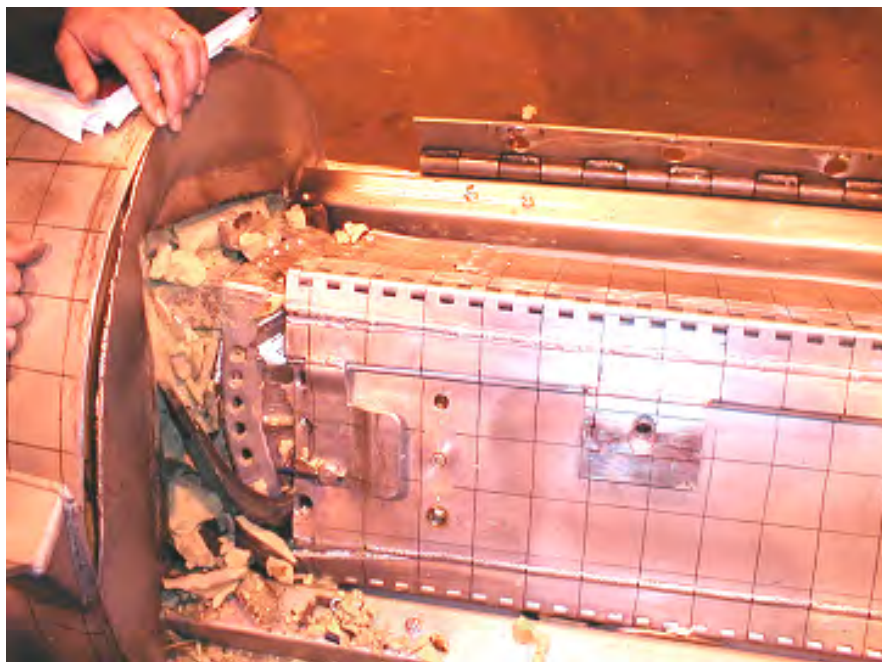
Traveller Prototype Clamshell and Bottom Impact Limiter After Test Series 3
